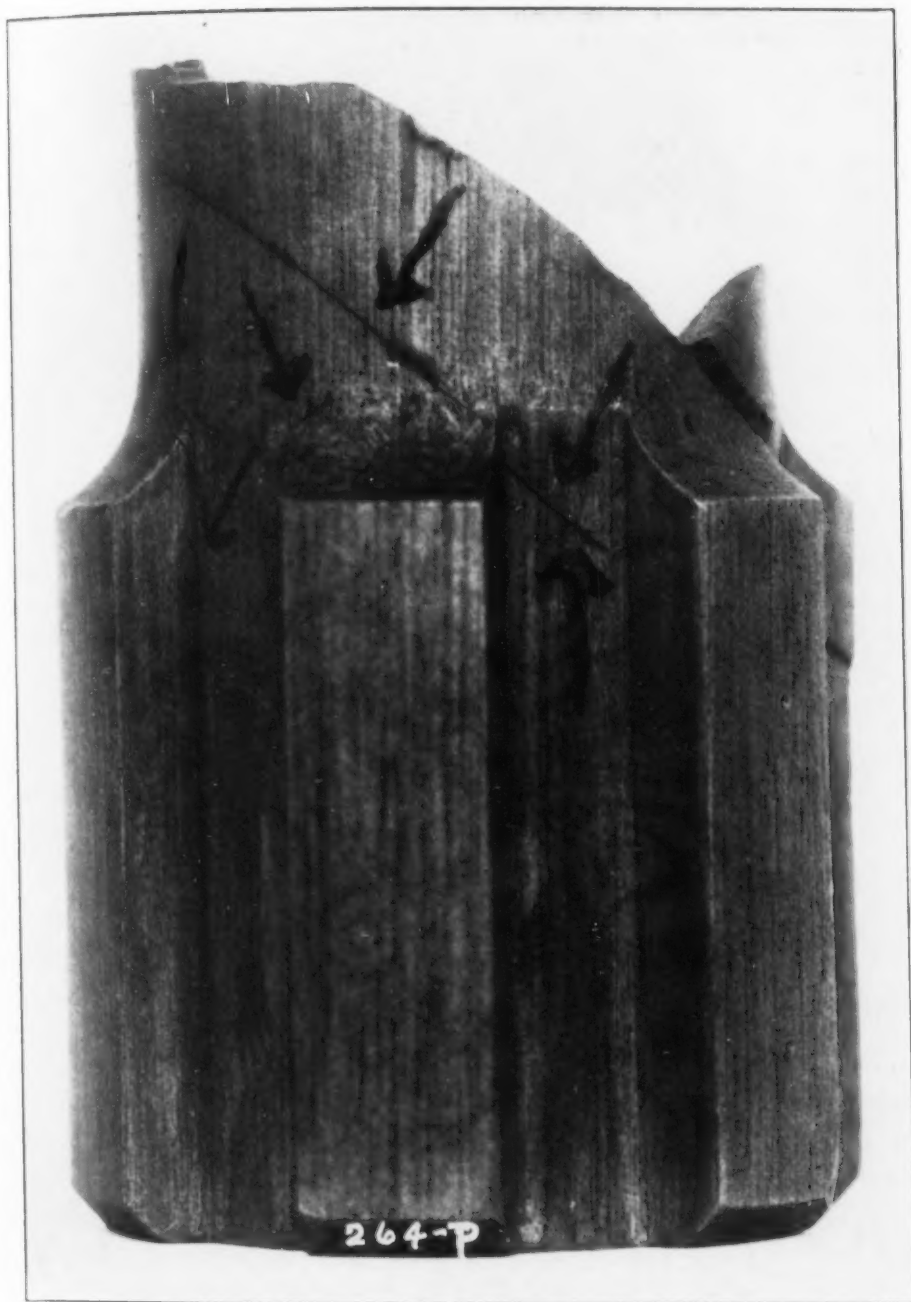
Photograph of Spline End of Failed Supercharger Drive Shaft Showing Hardening Cracks, $\times 1\frac{1}{2}$.
